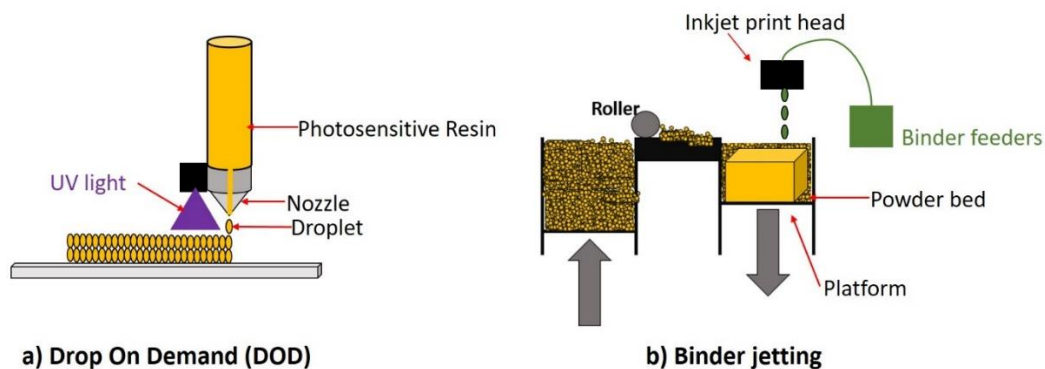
Illustration of material jetting 3D printing techniques a) Drop On Demand, and b) Binder Jetting.
